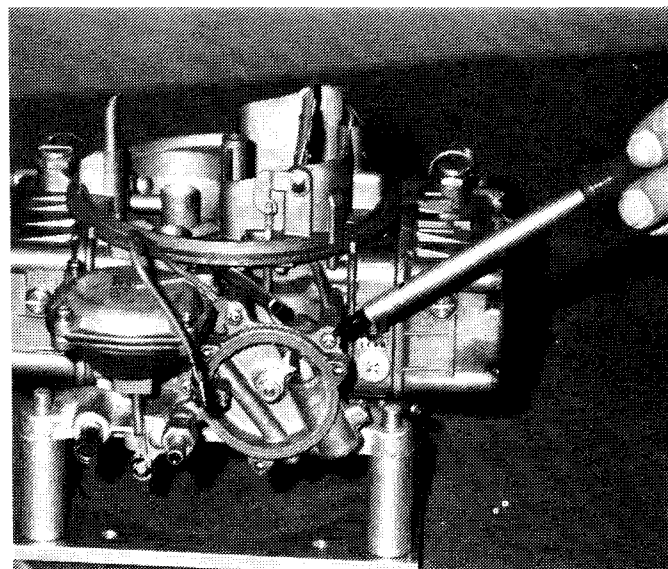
Remove choke housing by removing three screws holding housing to main body.
